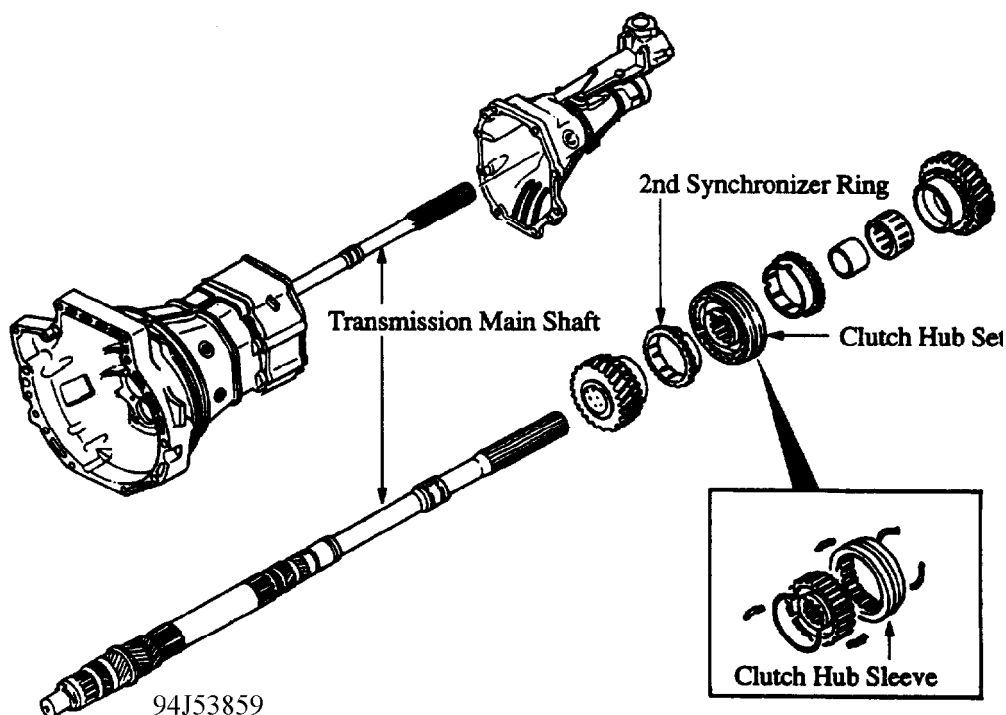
2nd Gear Synchronizer Ring and Assembly
